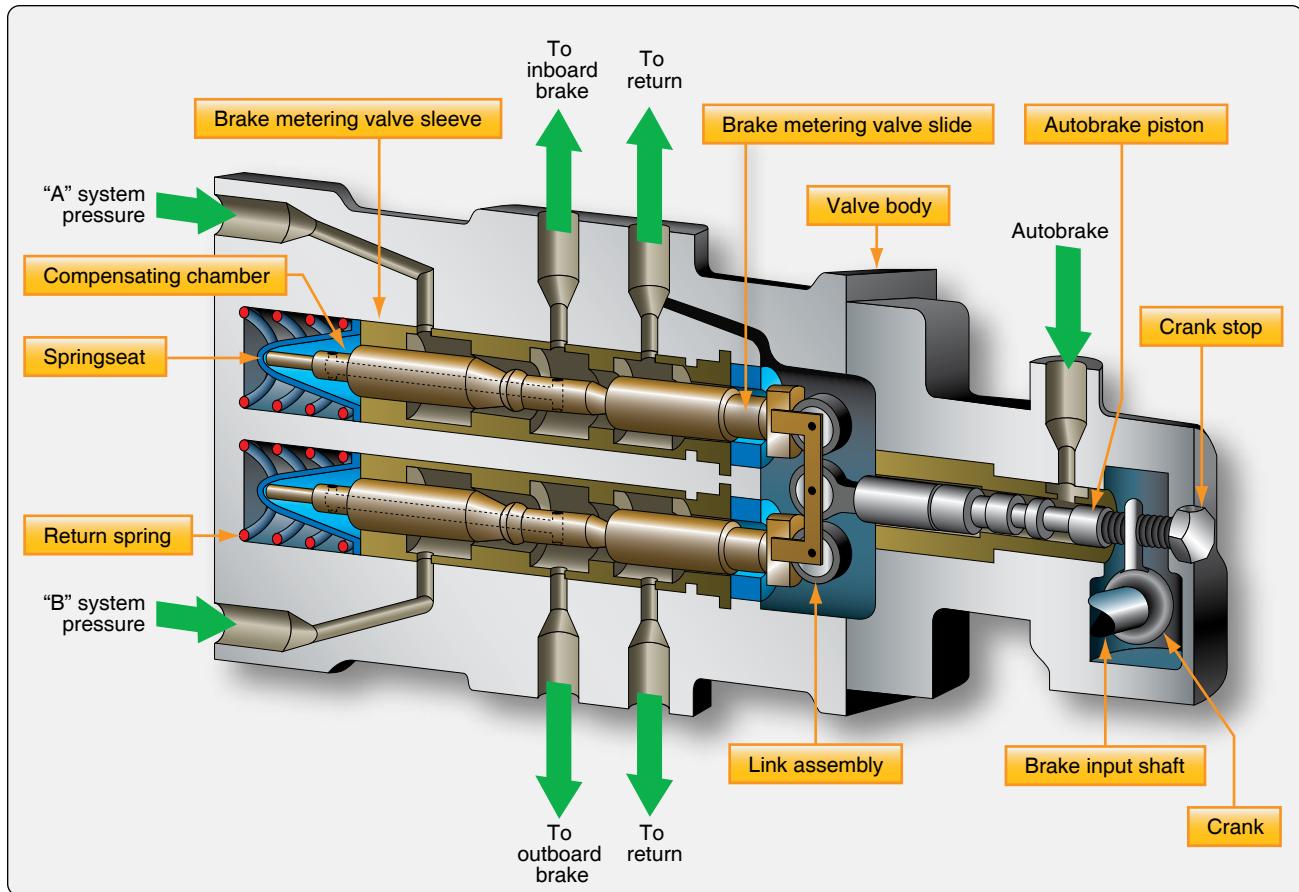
A brake metering valve from a Boeing 737. A machined slide or spool moves laterally to admit the correct amount of hydraulic system fluid to the brakes. The pressure developed is in proportion to the amount the rudder/brake pedal is depressed and the amount the slide is displaced. The slide/spool also simultaneously controls the return of fluid to the hydraulic system return manifold when brake pressure is released.
